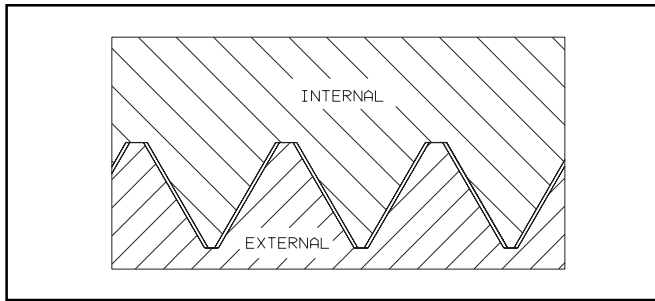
NPTF — Hand Tight-Crest to Root Contact
